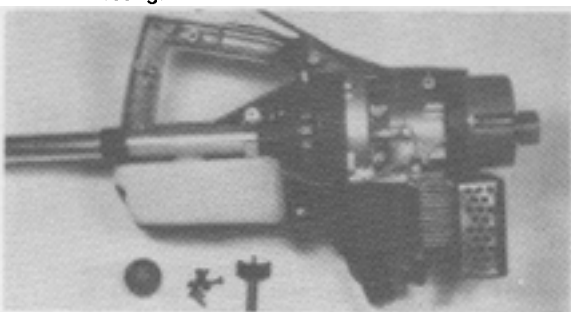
Trimmer shown with throttle, ignition switch and gas tank disconnected.
